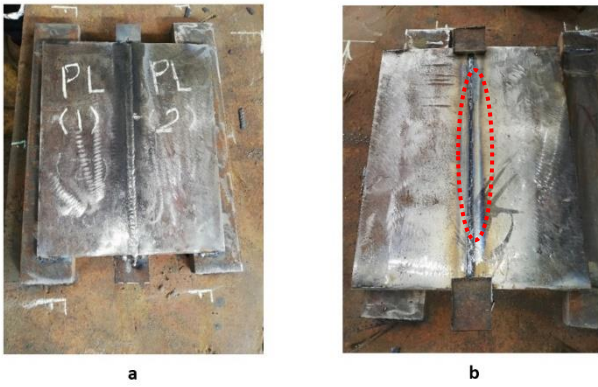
First welding joints: a) Face pass. b) Root pass
